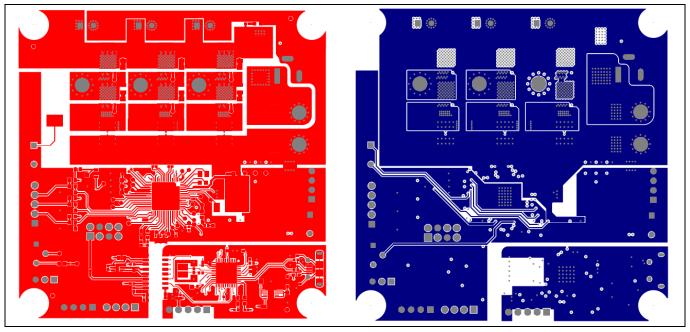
REF_IMD701A_720W_DC24 PCB top layer (left) and layer 2 (right)
